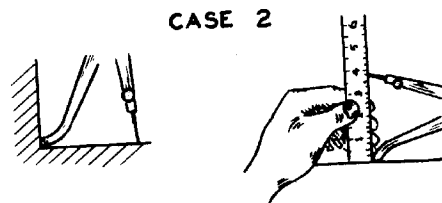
ADJUSTING SCRIBER LEG WITH CALIPER REVERSED
